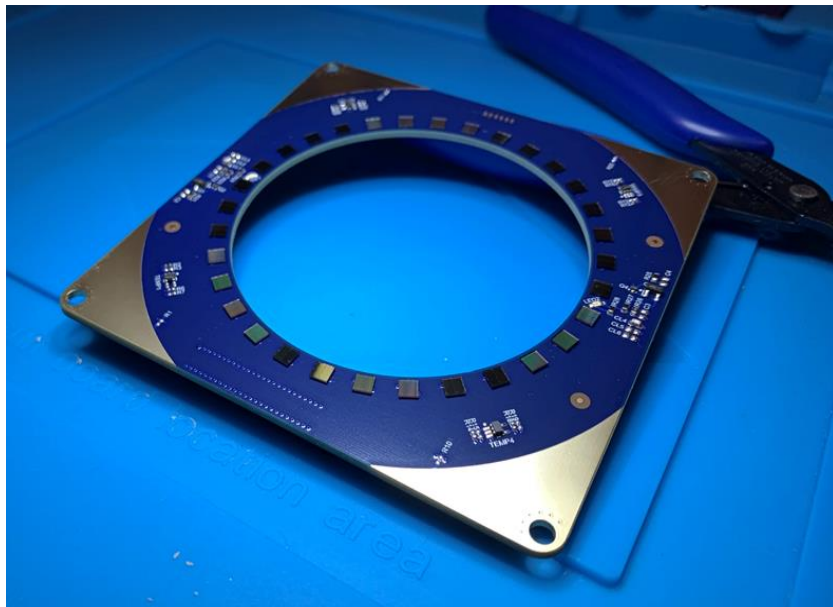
PCB top view of the SiPM Module. Manufactured in October 2020.
